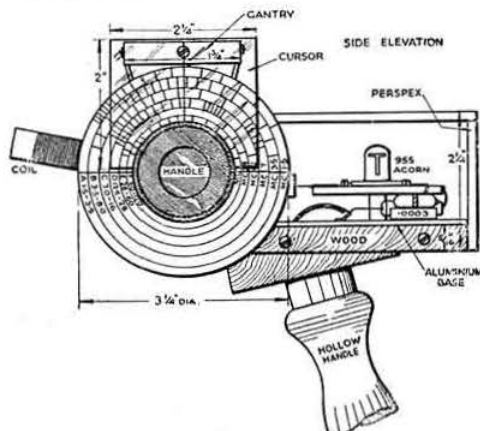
Sketch showing layout of the grid-dip oscillator.
